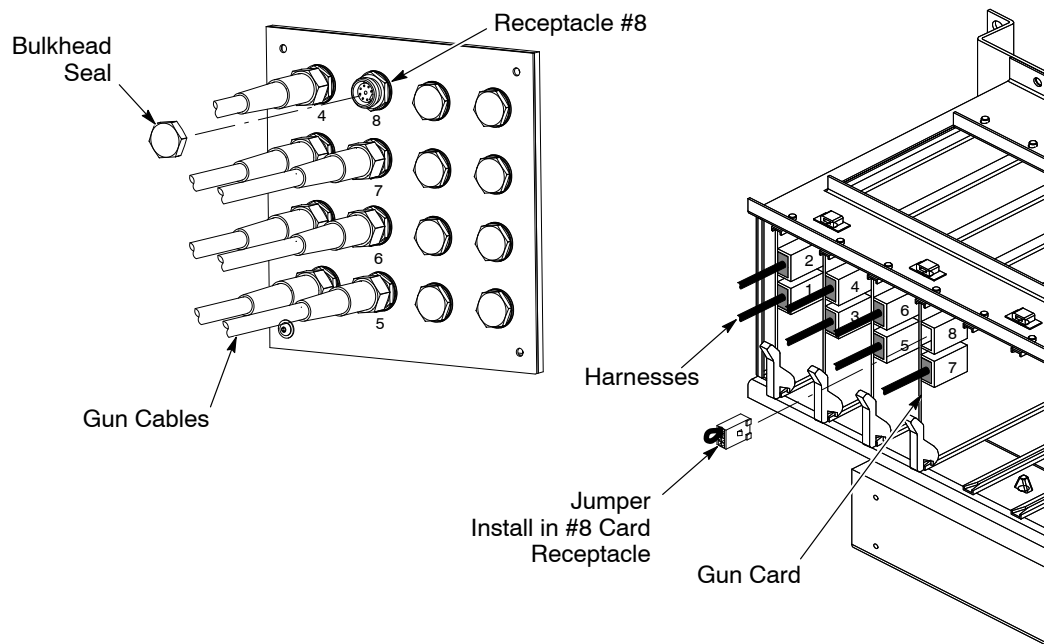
Seal and Jumper Installation – Example Showing 8 Gun System Using 7 Guns
